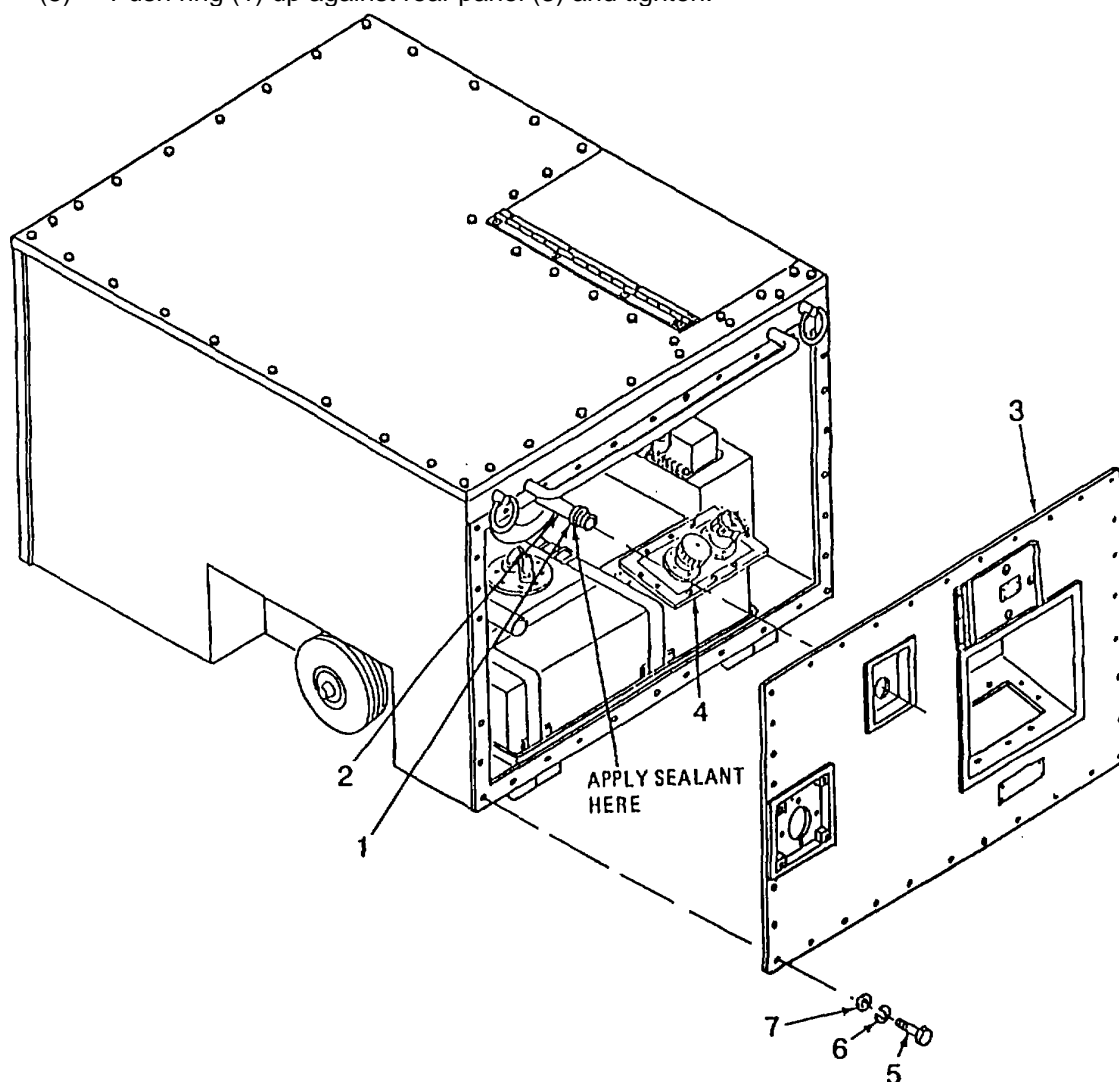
Rear Panel Assembly (Sheet 3 of 3)
